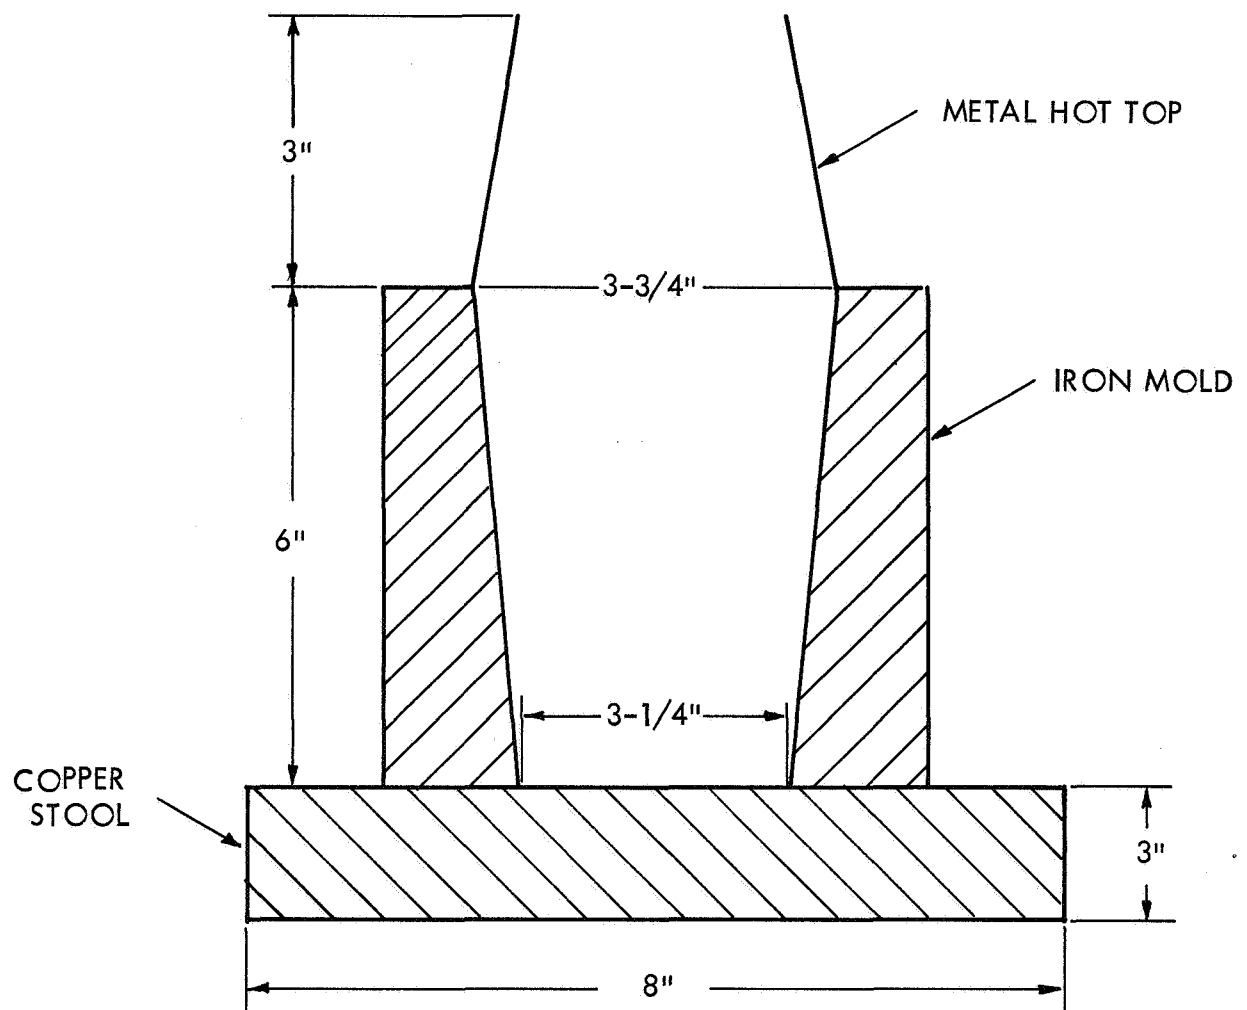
"Flower Pot" Type Mold Used in Casting Extrusion Ingots.
